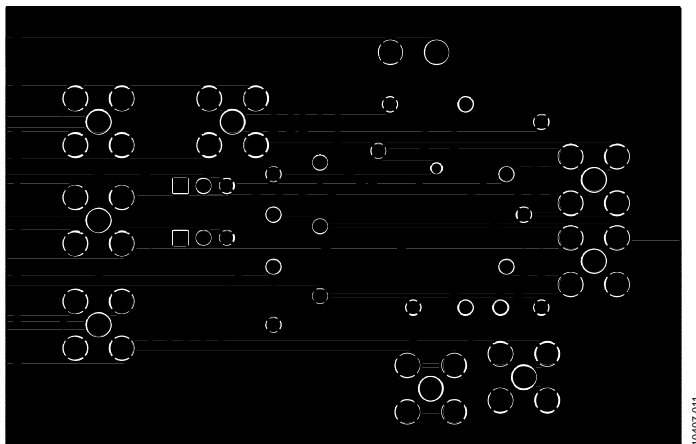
EVAL-ADN469xEFDEBZ Solder Side
